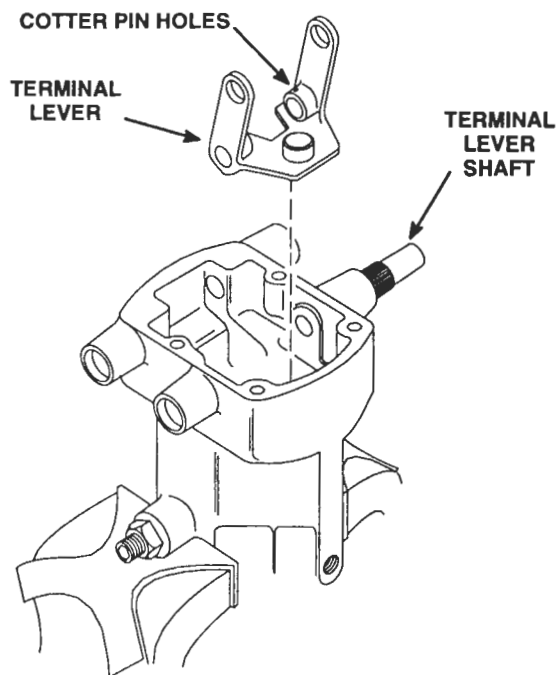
Installing Terminal Lever Shaft in Governor Housing and Terminal Lever
